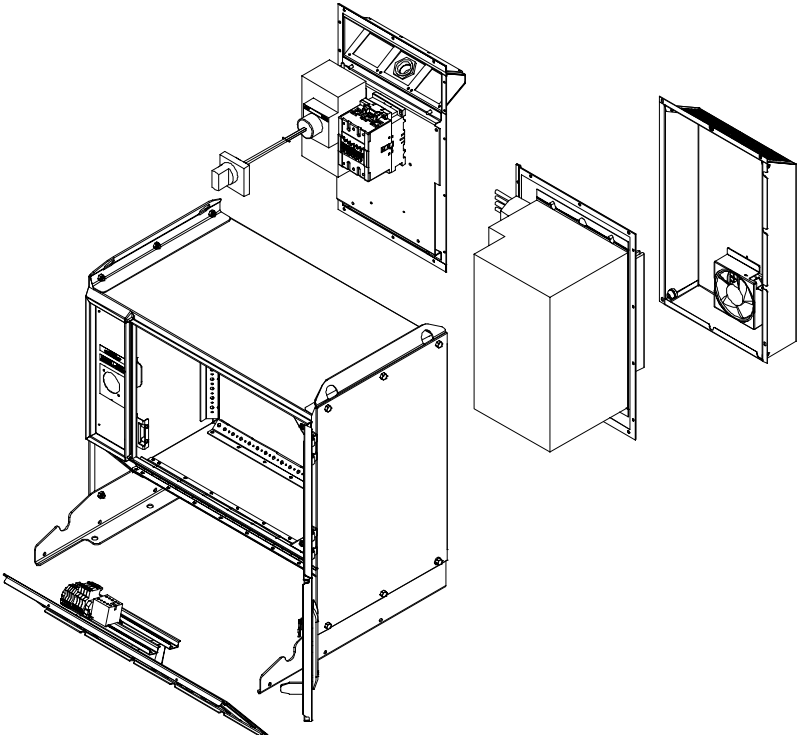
Exploded view drawing of the SpotWelding cabinet.
